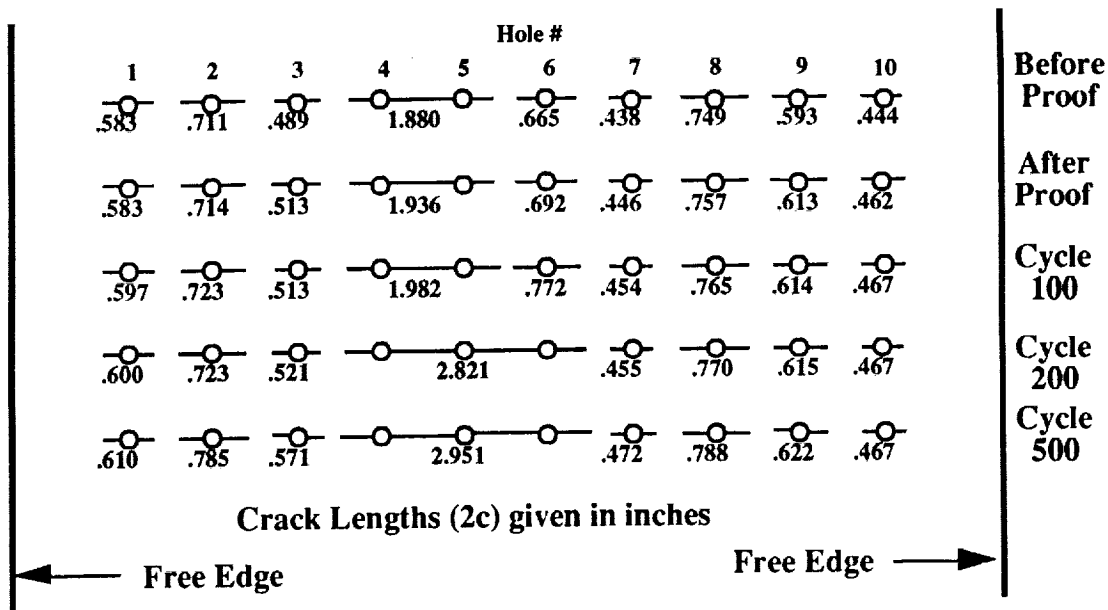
Progression of crack growth in open hole specimen A2-06 before and after the application of a 1.33 proof stress (541 cycles to failure).
